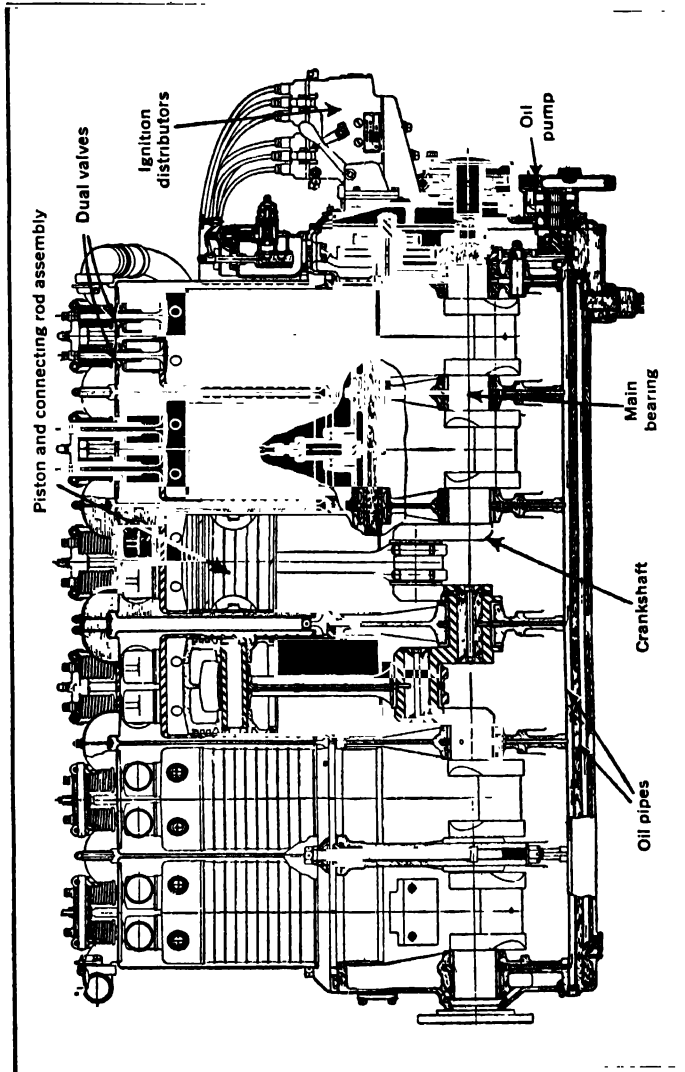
Longitudinal Sectional View of the Packard Model 1551 Dirigible Airship Engine Showing Simple and Rugged Construction.
